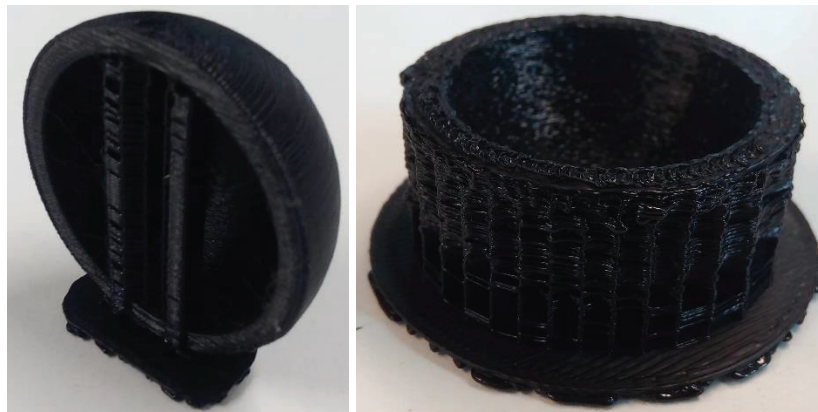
3-Axis Material Extrusion with Support Structures: (left) Vertical Print, (right) Horizontal Print
